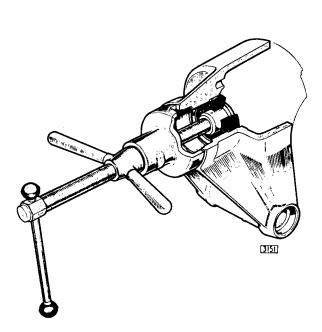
Replacing the hub bearing outer races using Churchill Tool No. J.20A with adaptor No. J.20A-1
